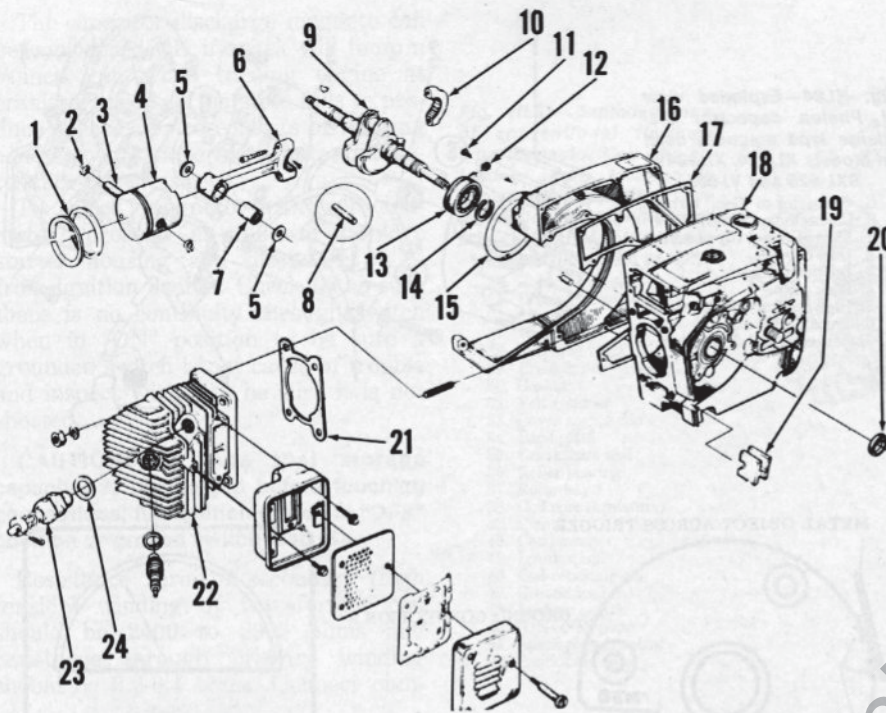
Exploded view of engine assembly. Compression relief valve is used on Models XL-923, XL-924, XL-924W and VI-944.
